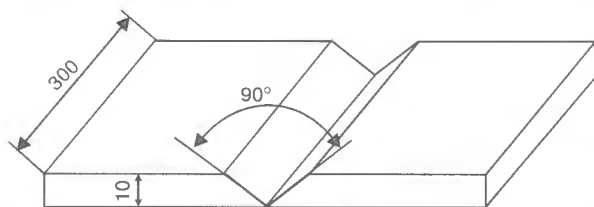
Scheme of groove preparation for welding with dispersed melt
